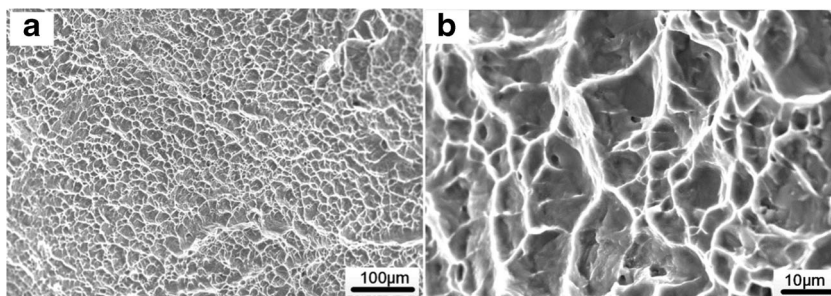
The fracture surface of laser welded Ti-22Al-27Nb and TA15 joints at 650 °C. a Ductile dimples throughout the fracture surface. b A higher magnification of a
